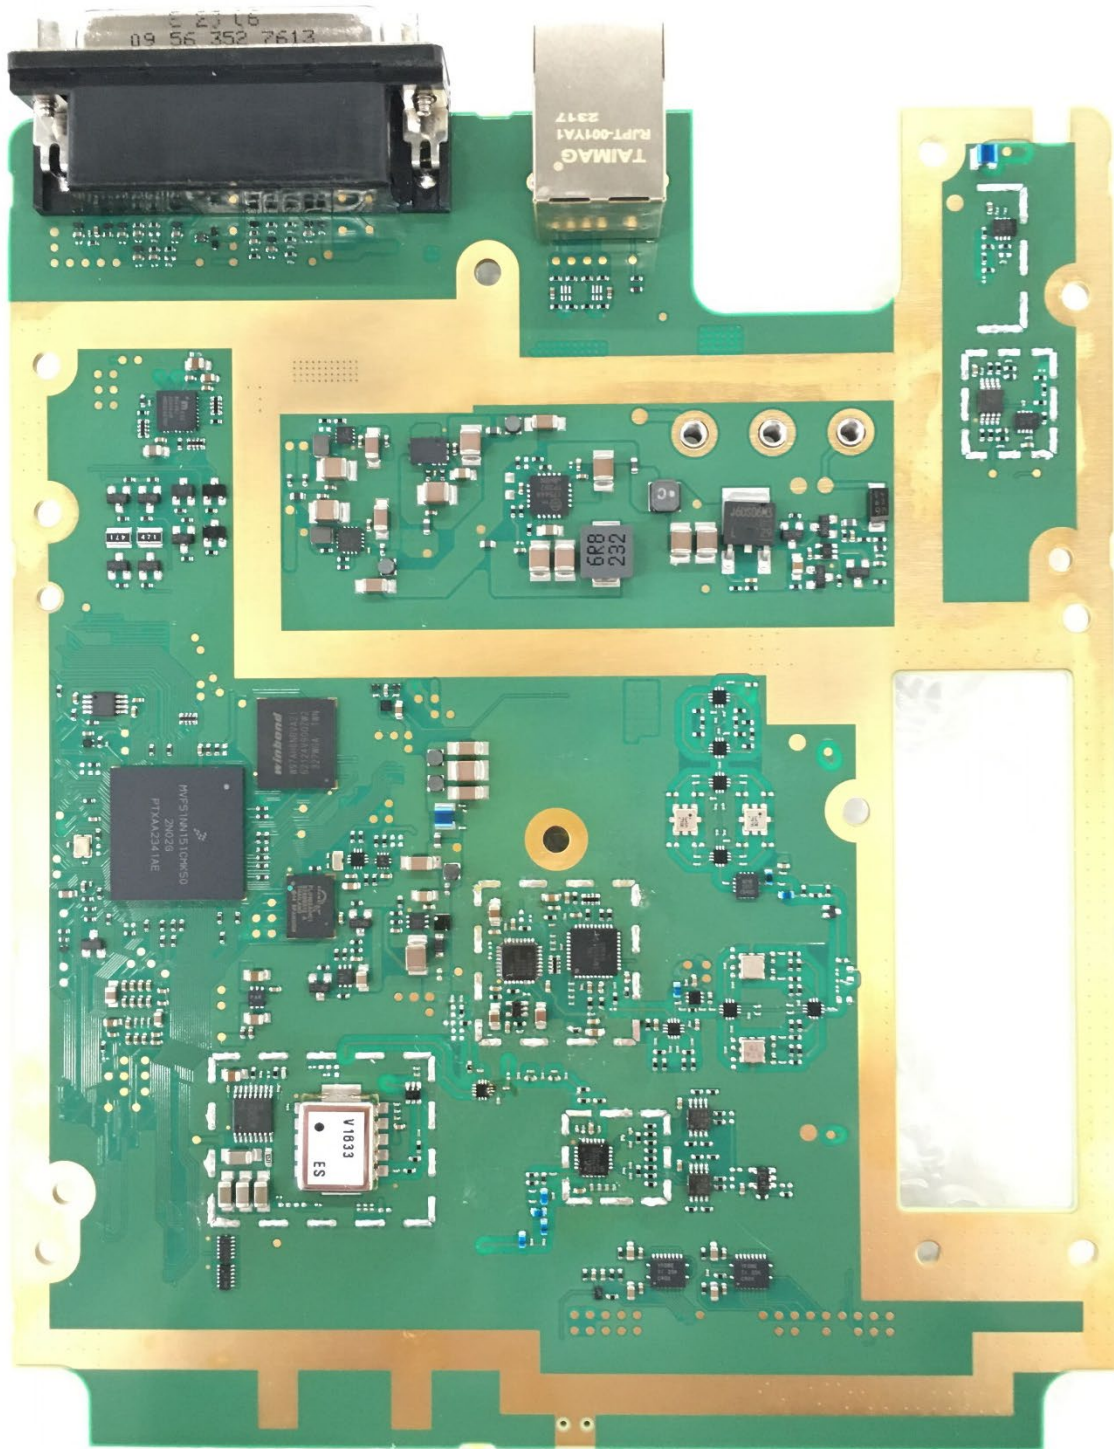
XL-85M RF Board – Solder Side, Unshielded
